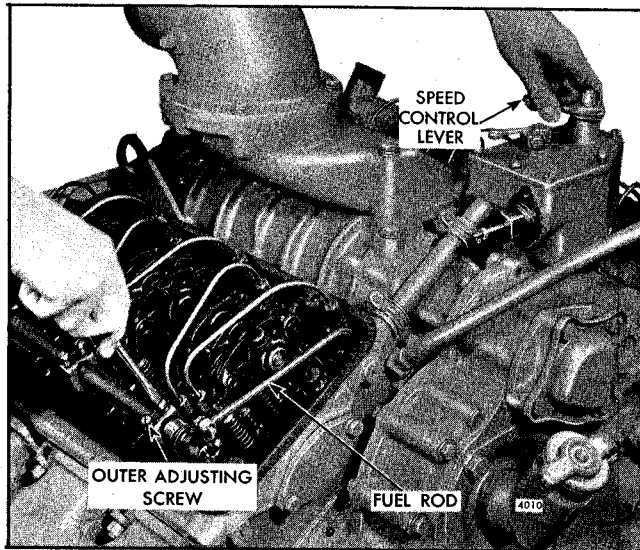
Positioning No. 3L Injector Rack Control Lever
